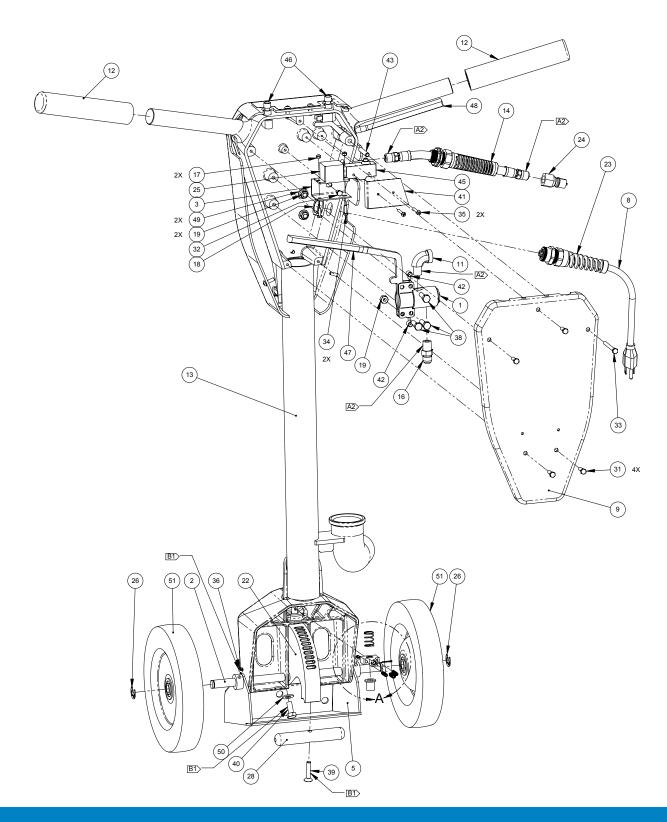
Upper and Lower Handle 110V/60Hz Assembly - View 2 of 3 604-051-105 Rev. C
